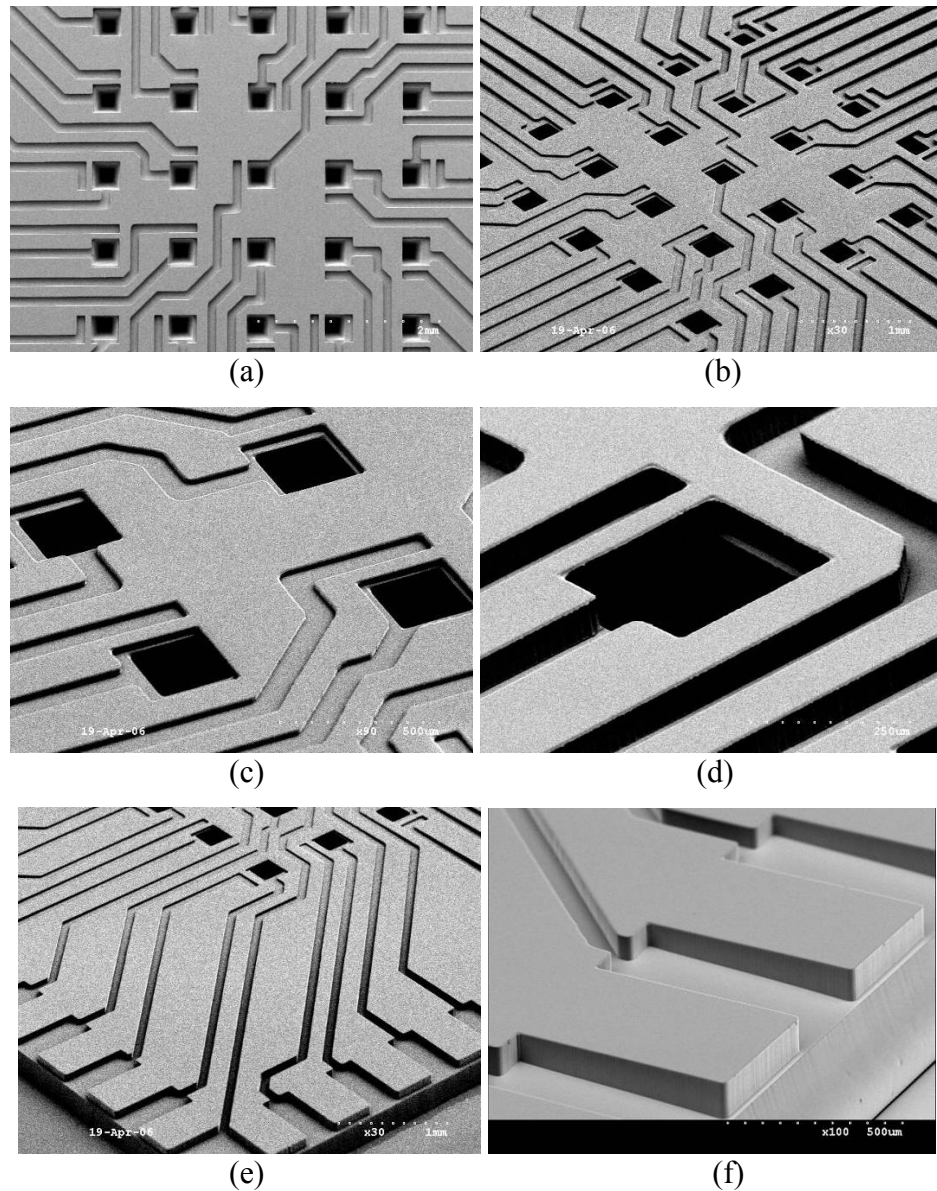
Fabricated double-layer SU-8 mold for 3-D microelectrode array; (a) Top view of the mold, (b) oblique view of the mold, (c) region where 3-D microelectrodes will be formed, (d) close-up view of (c), (e) region where electrical contacts will be formed, (f) close-up view of (e)
